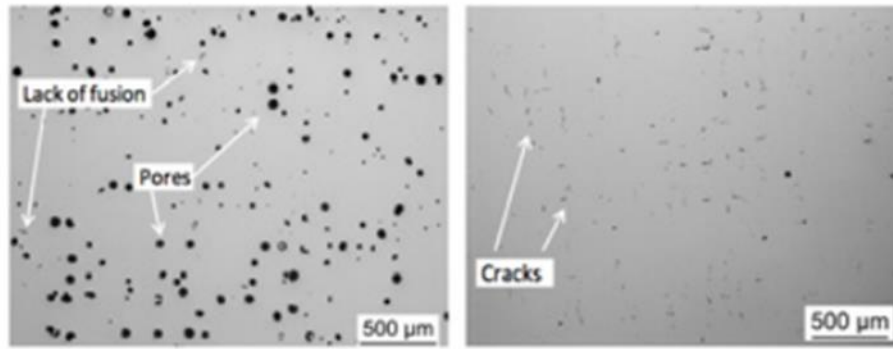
Defects found in parts produced by L-PBF technology [79]
